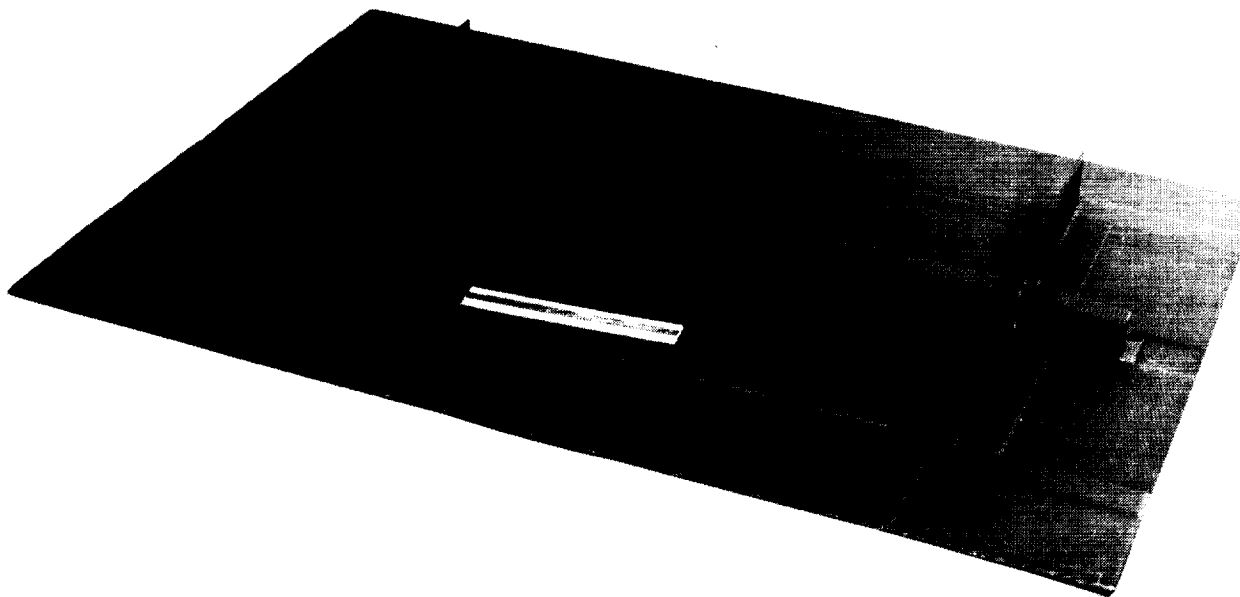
Flat Frame/Stiffener Intersection Specimen (Stiffened Side Overview)
